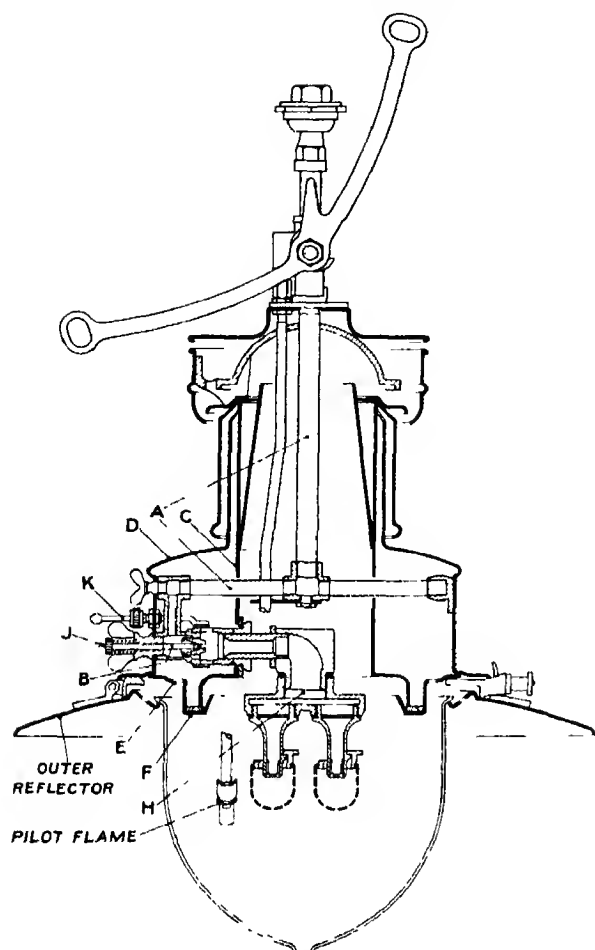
CROSS-SECTION OF TYPICAL SUSPENSION LAMP
